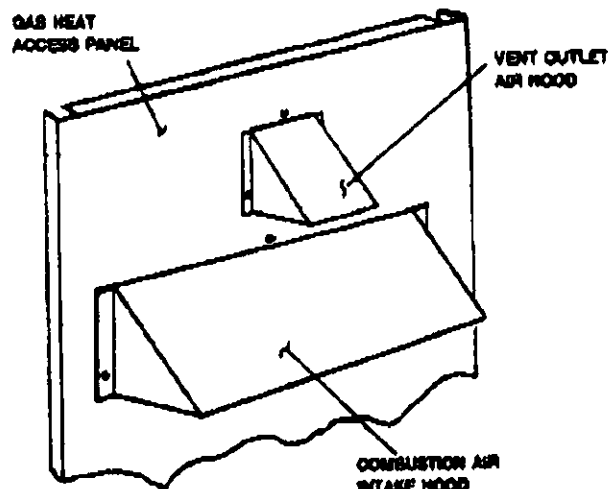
VENT AND COMBUSTION AIR HOODS
